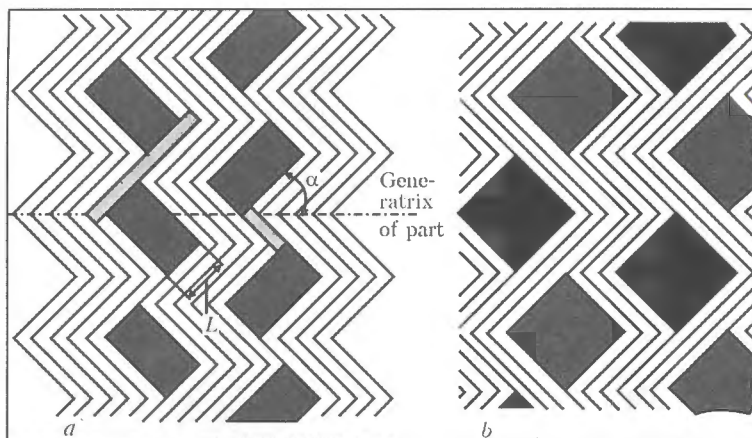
Schemes (a, b) of craters formation in hardfacing of working surface using the zigzag welds
